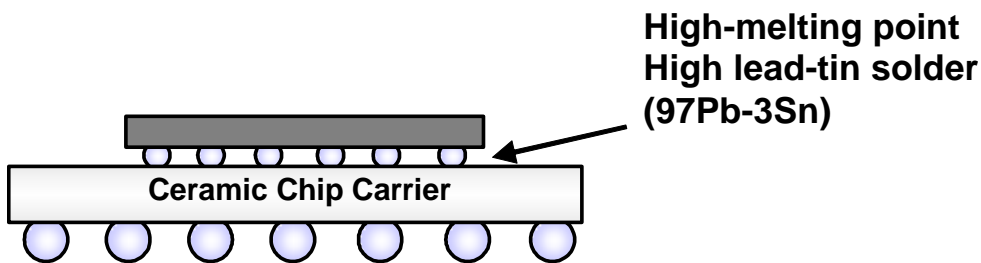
Attachment of a flip chip with high-melting point solder bumps (97Pb-3Sn) to a ceramic chip carrier.
